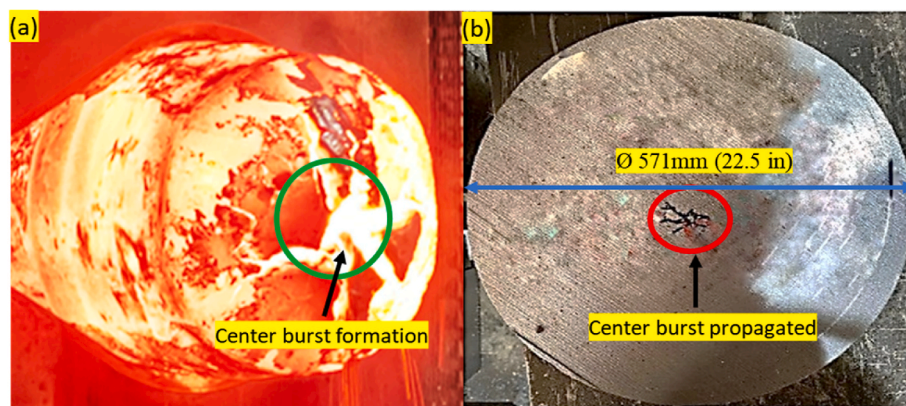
Center burst occurred during the cogging of AISI H13 steel (a) center burst formation at extreme end of the workpiece (b) center burst propagated along the center axis of the workpiece.
